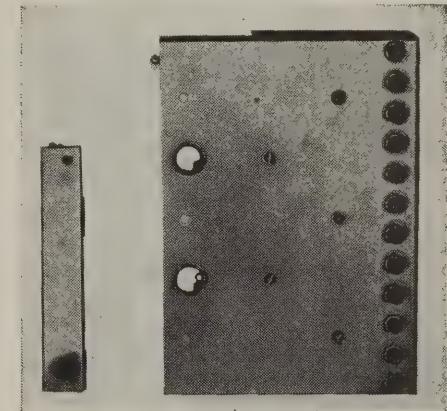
A 12-note gradual-contact key switch assembly. Single switch at right.
